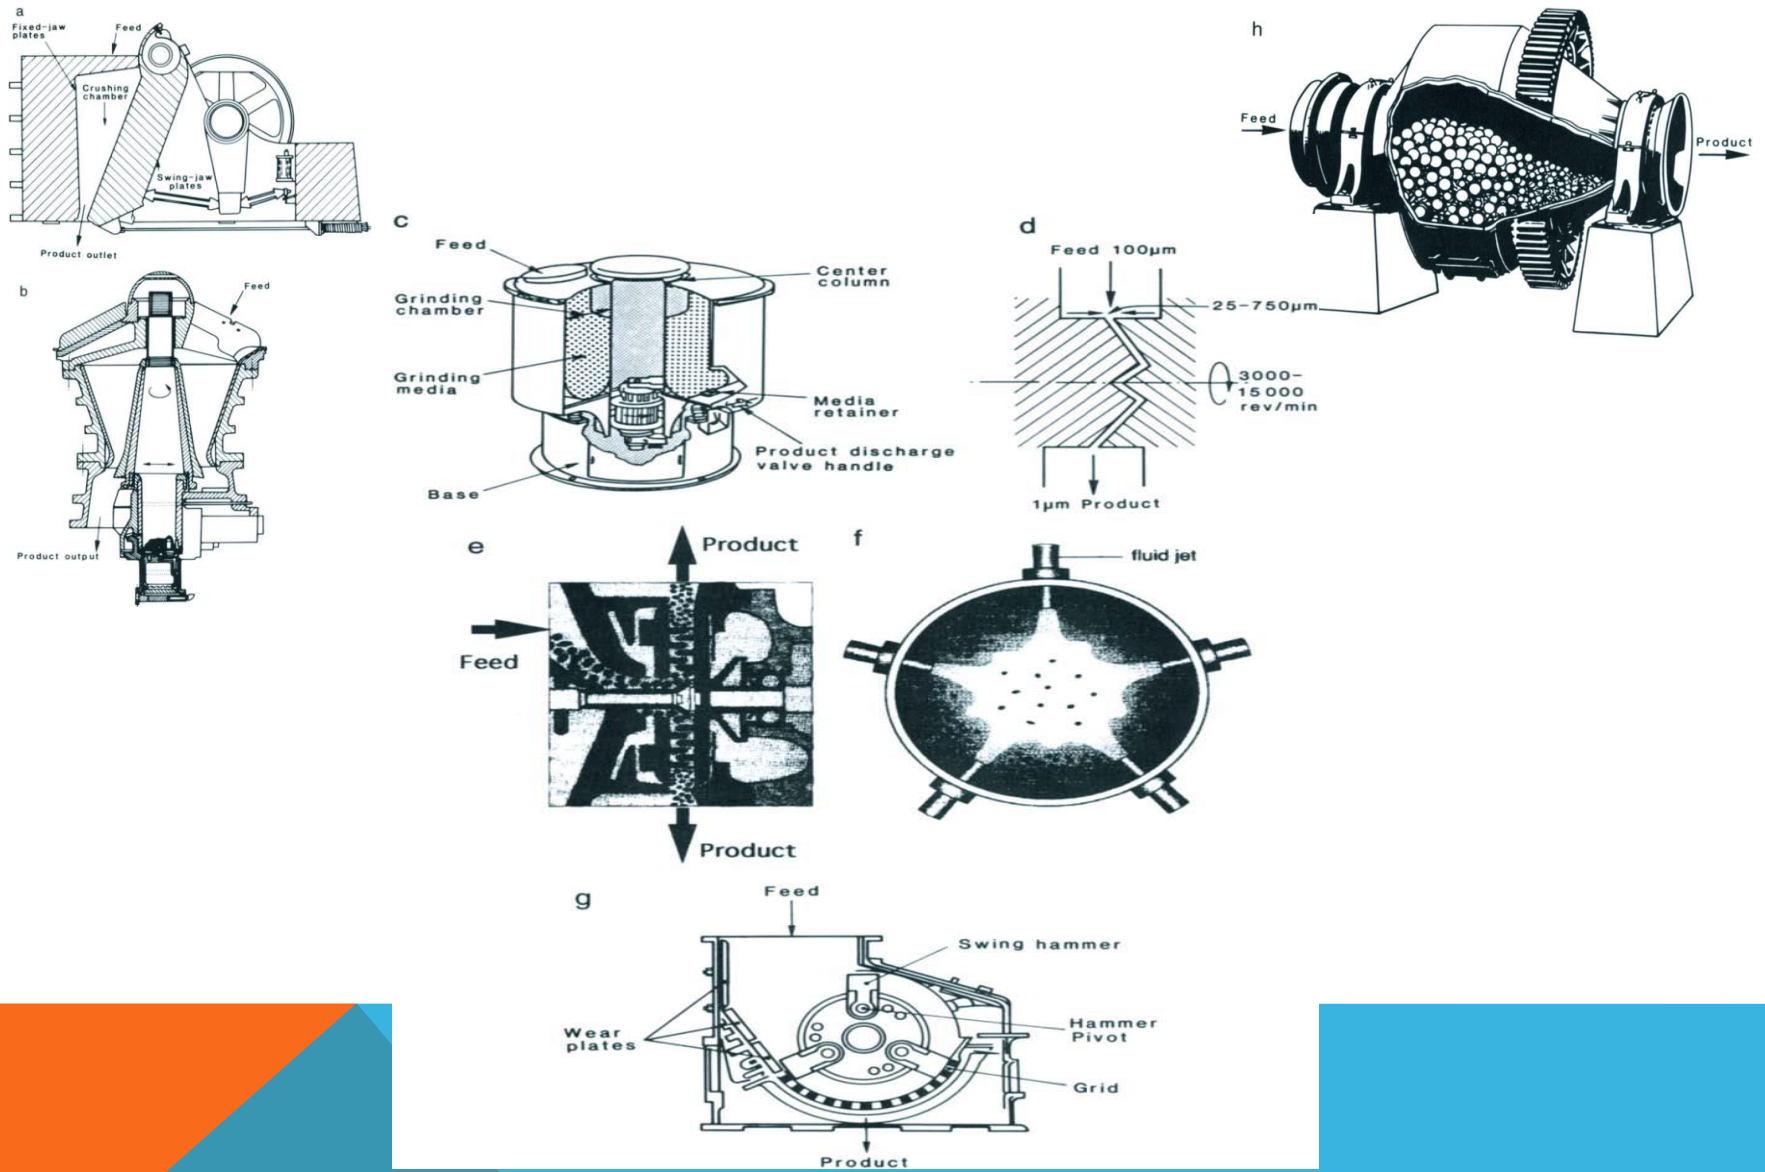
Crushing and milling equipment. (a) Jaw crusher, (b) gyrotory crusher, (c) vibratory mill, (d) fluid shear mill, (e) pin mill, (f) fluid jet mill, (g) hammer mill, and (h) ball mill.
